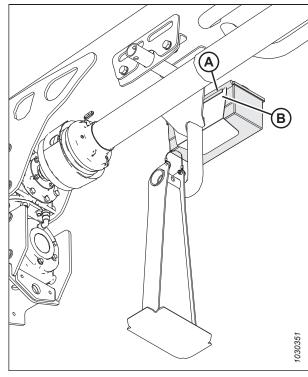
Toolbox Mounted on Jack Stand Bracket
